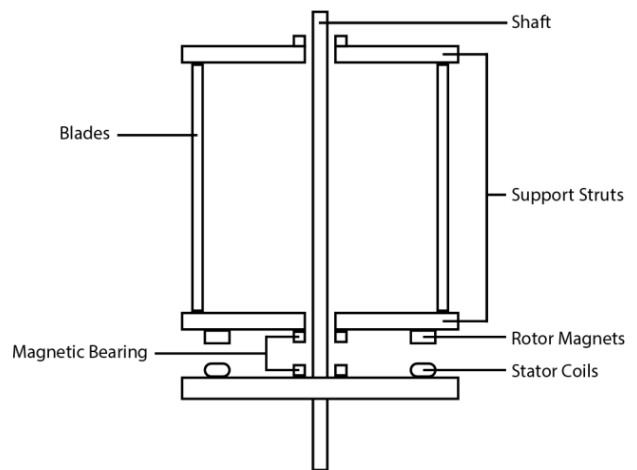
Configuration of magnets, blades, rotors, stators, and shaft in design
